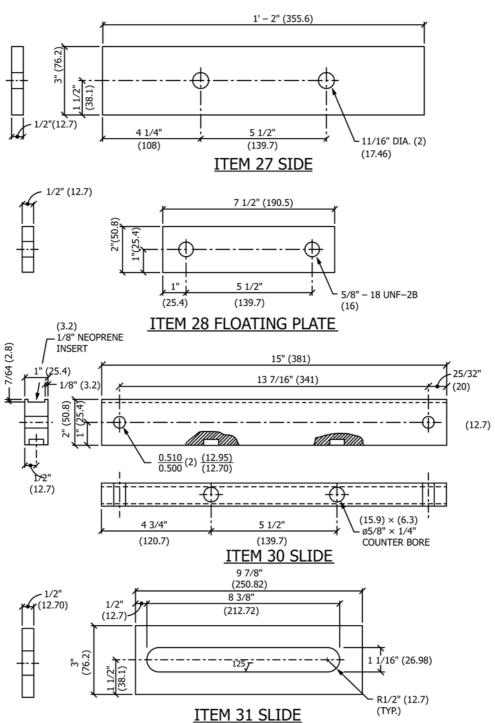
Detail Drawings of Bond Wrench (continued)
